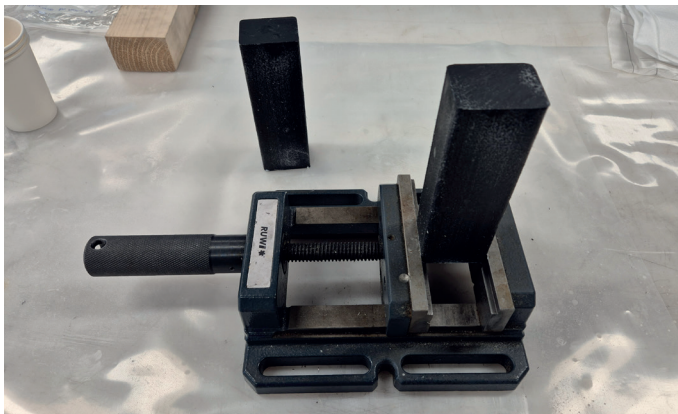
HDPE mould clamped in a portable vice bench (own image)
